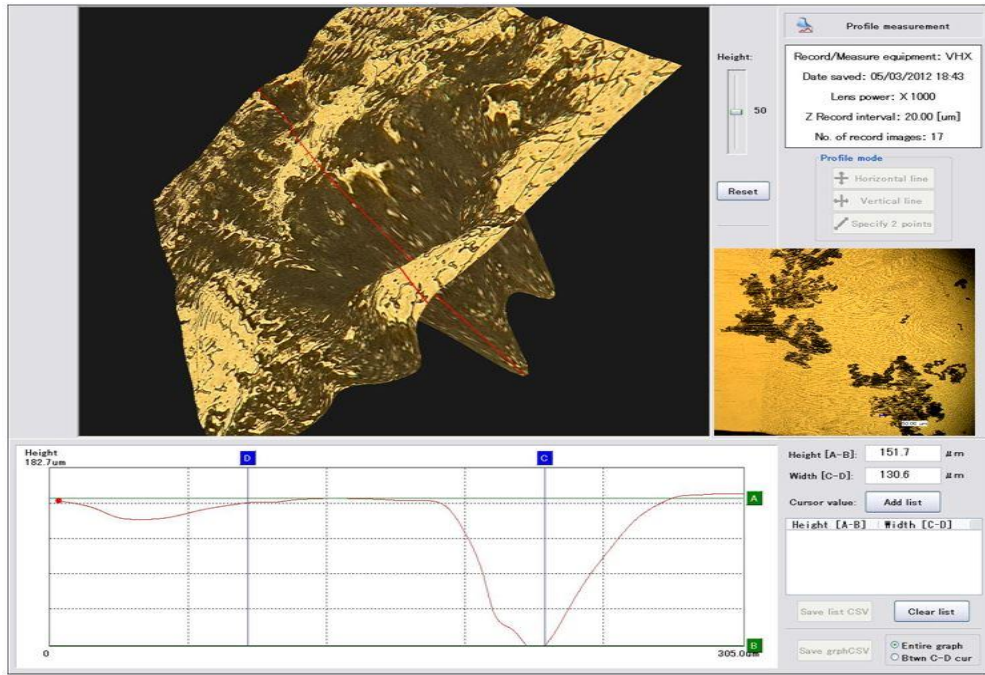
Corrosion profile in GTA welding bead
